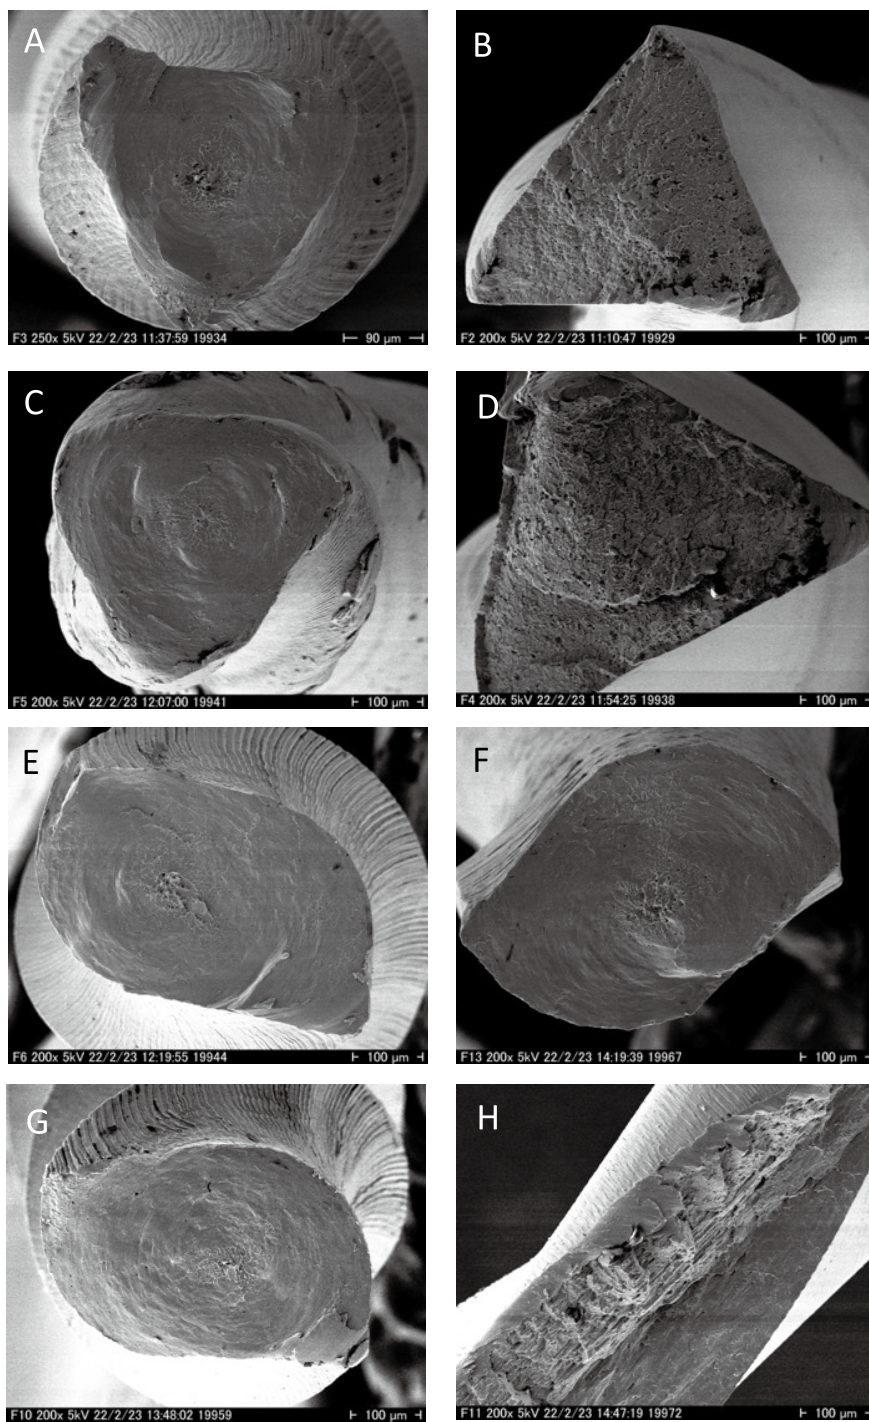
Scanning electron microscopy image of fracture surface
